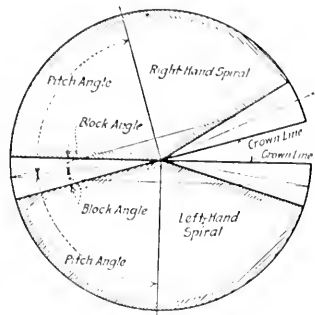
ENGAGEMENT OF THE MOLDING CROWN GEARS
